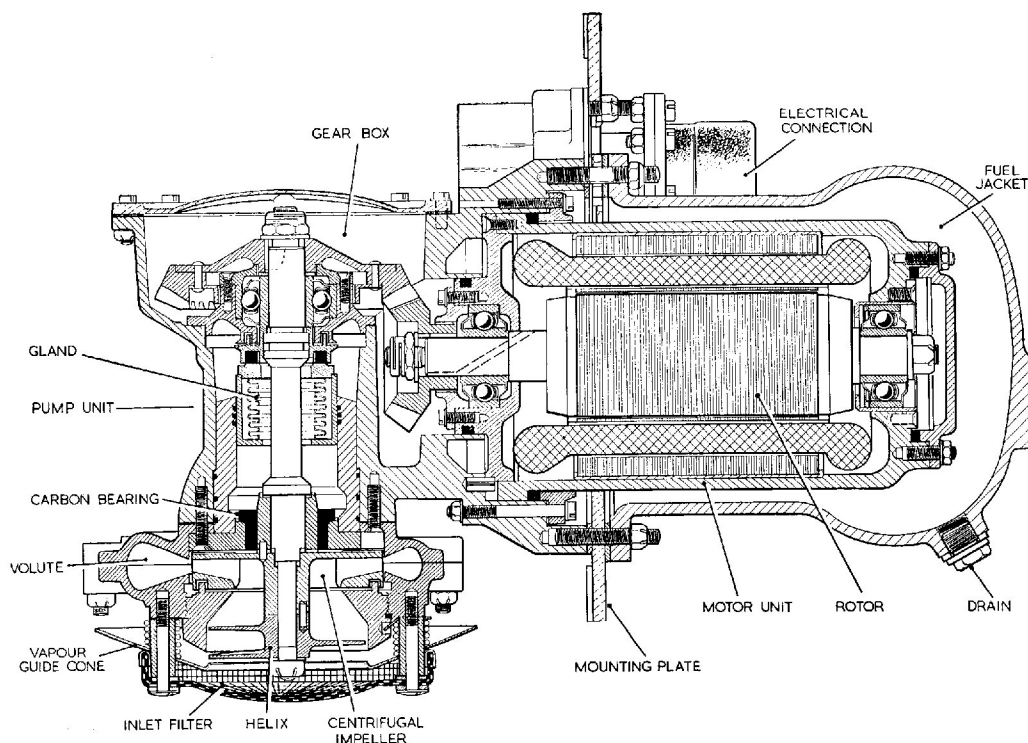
Sectional view of SPE. 1234 Mk. 2 fuel pump
